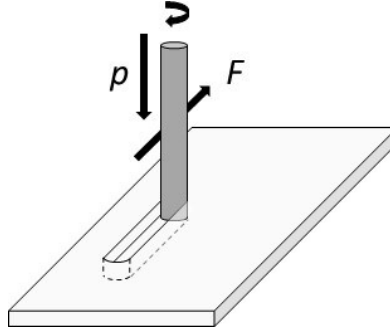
Schematic representation of micro-cutting by SACE process with a rotating tool-electrode (radius r) moving horizontally with feed-rate F at an axial depth of cut p .
